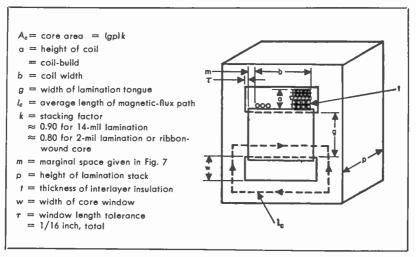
Dimensions relating to the design of a transfermer coil-build and core.
